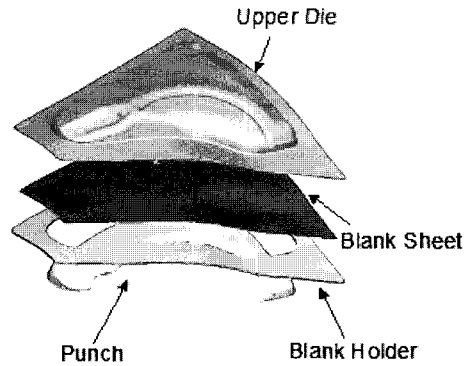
Layout of draw dies for forming analysis based on rigid tools
